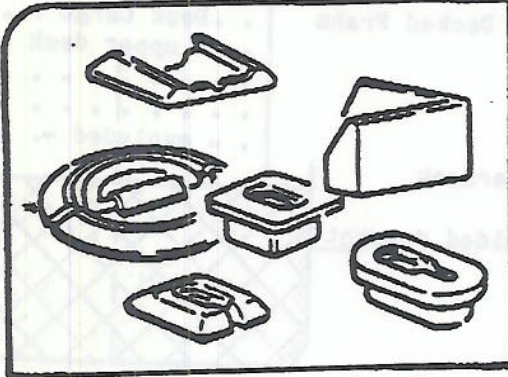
Intermediate & bottom stackers twistlock, bridge fittings
